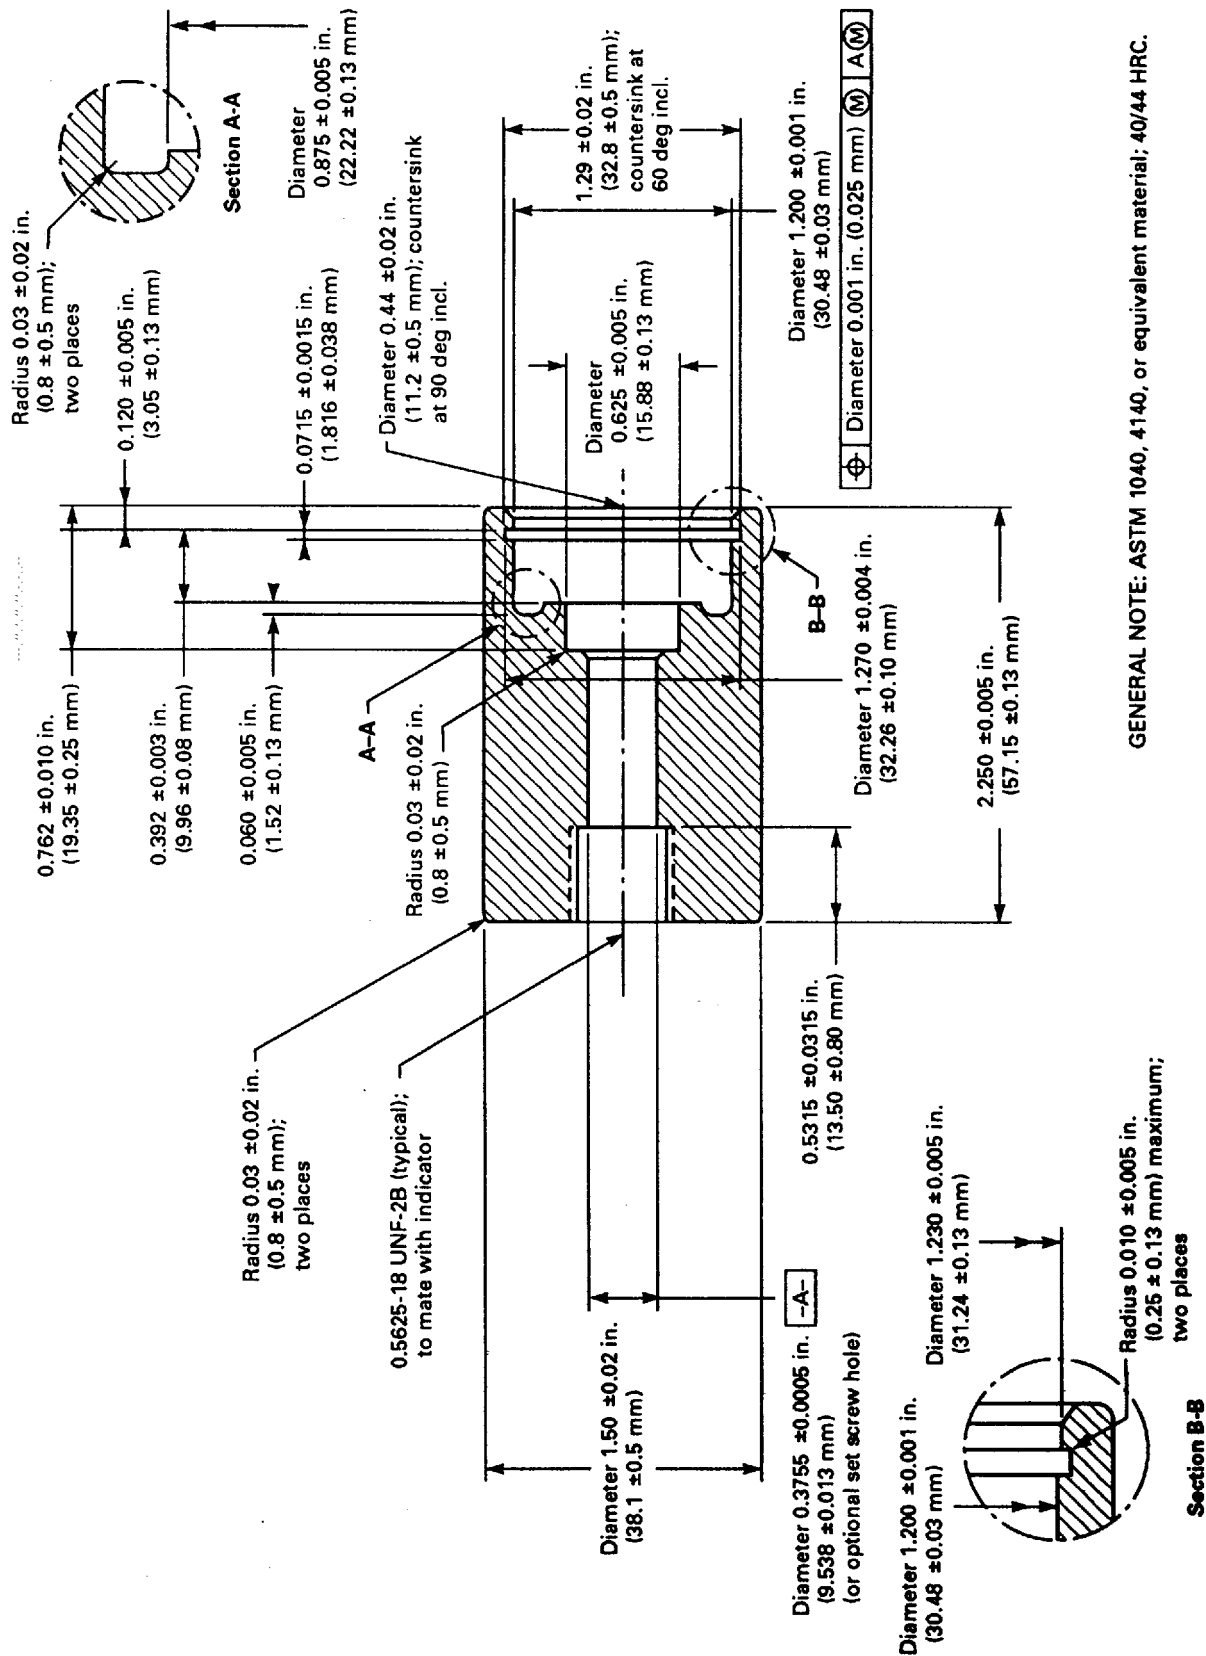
PENETRATION GAGE ASSEMBLY FOR CROSS TIP SCREWDRIVER
